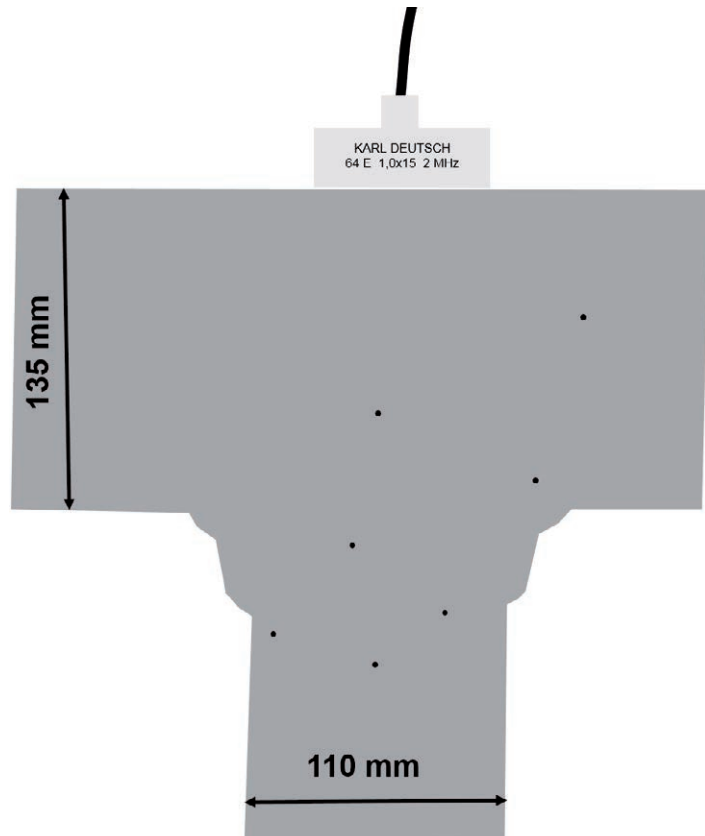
T-joint with seven side drilled holes, Ø 2 mm
